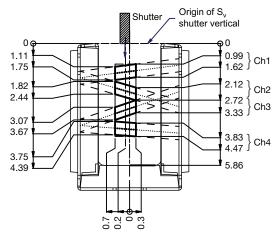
Top View Sensor, Channel Positions and Origin of Vertical Shutter, tolerances ± 0.2 mm
